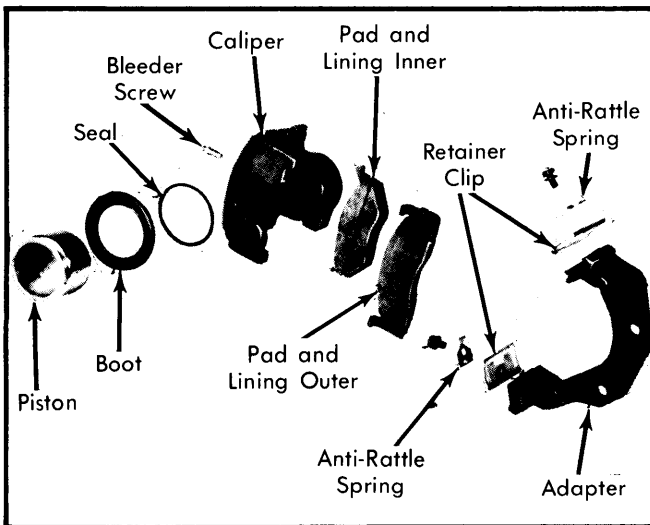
Exploded View of Chrysler Single Piston Disc Brake Caliper
